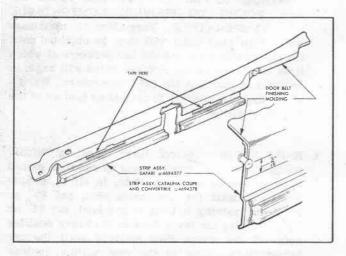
Tape Notches in Door Glass Run Channel Strip
